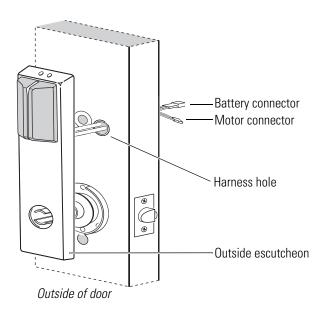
Feeding the wire harness connectors through the harness hole (B.A.S.I.S. Lock shown)
